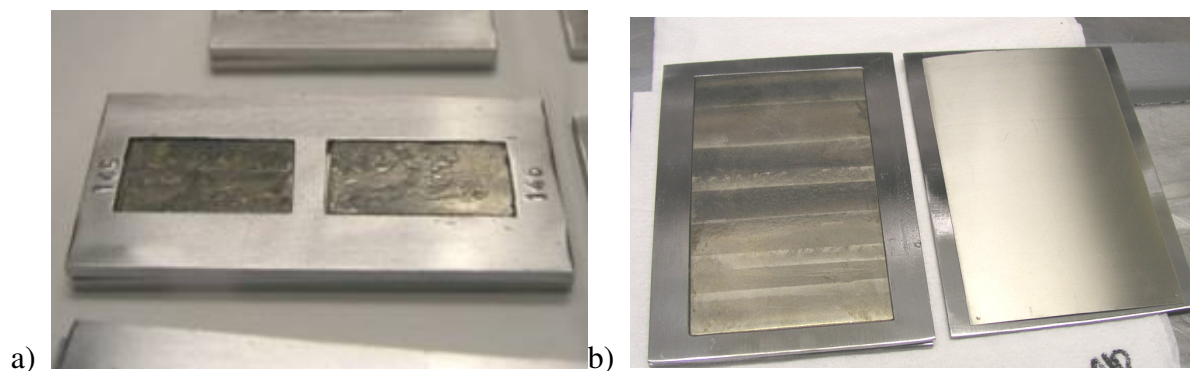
UMo coupons hot rolling assemblies in process, a) minifoil size coupons and b) full size coupon.
